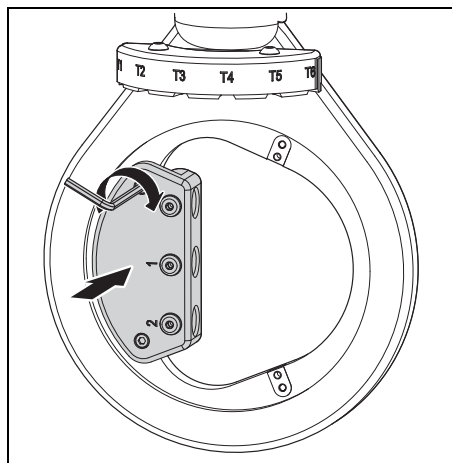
Ceramill Motion / Ceramill Motion 2 4X
